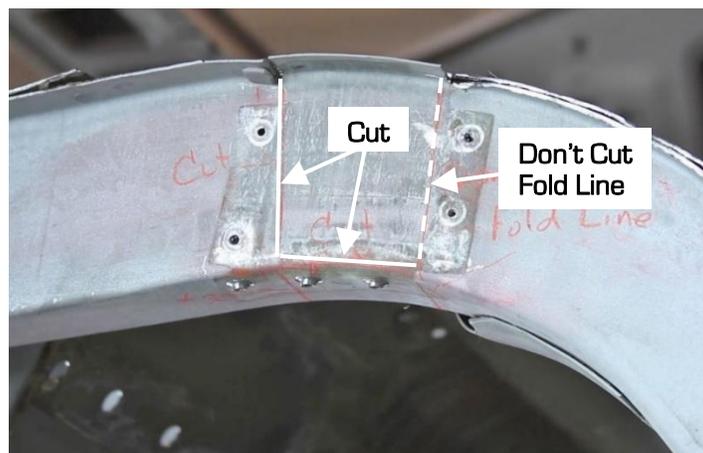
Locate Outer Frame Rail Fold & Cut Lines
